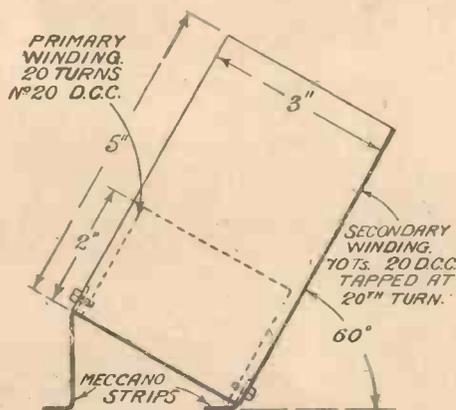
A Good Design for a 300-500 m. H.F. Transformer.
